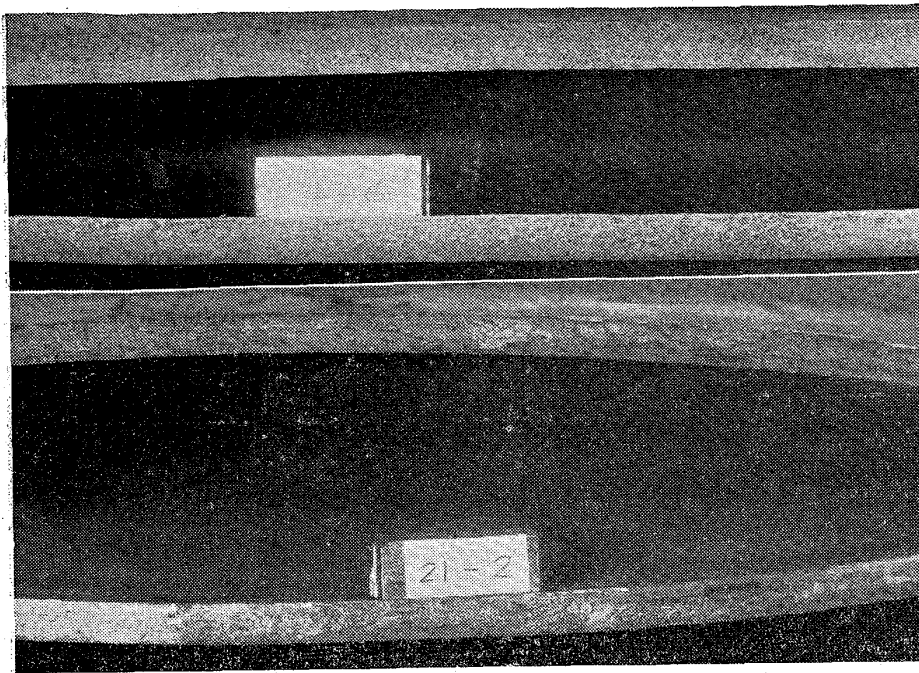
Fracture surface of 5LX-X52 pipe.
